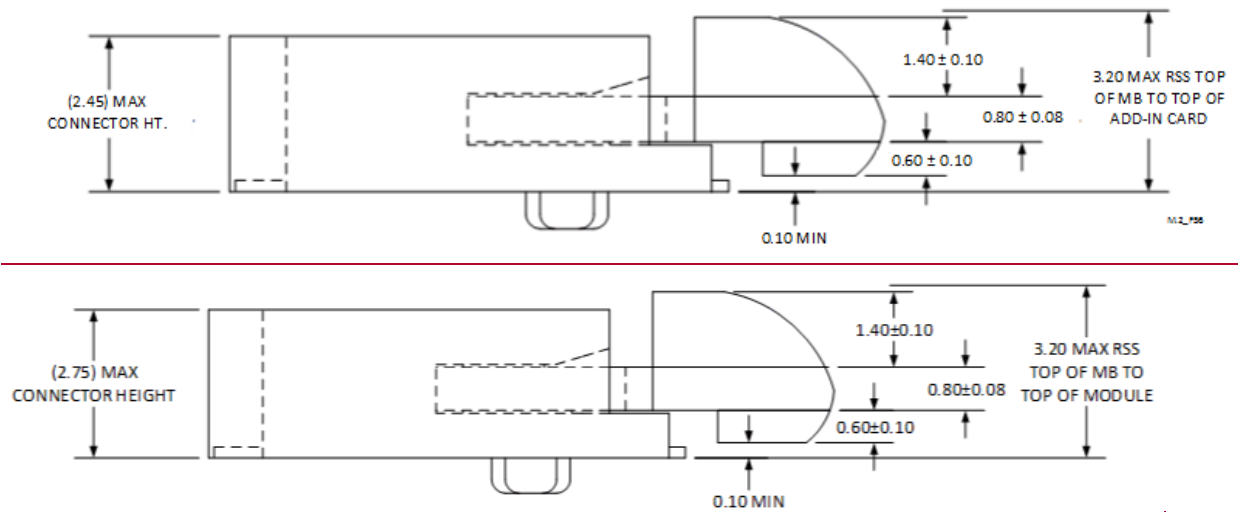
H2.8-D4 - Stack-up Top Mount Double-sided Add-in Card for 1.5 Maximum Top-side Component Height with 0.7 Maximum Bottom-side Component Height
